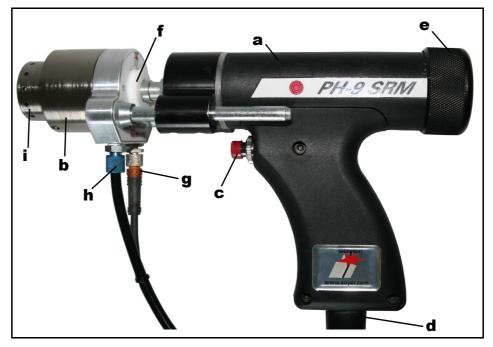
PH-9 SRM<sup>12</sup> stud welding gun
